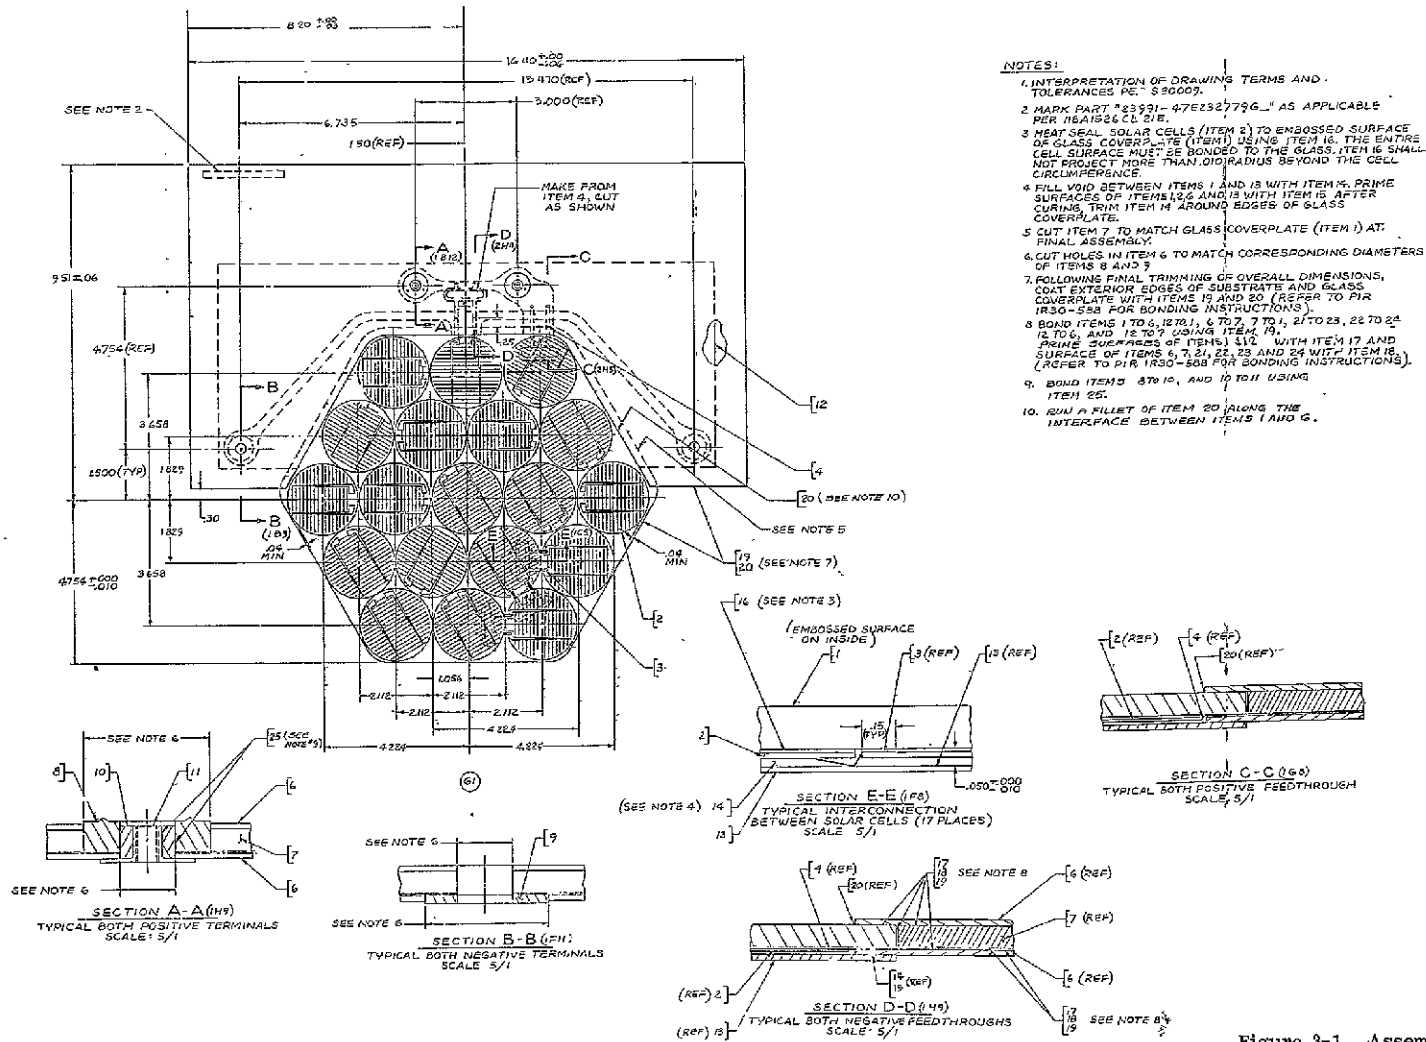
Assembly Drawing of Shingle Solar Cell Module
